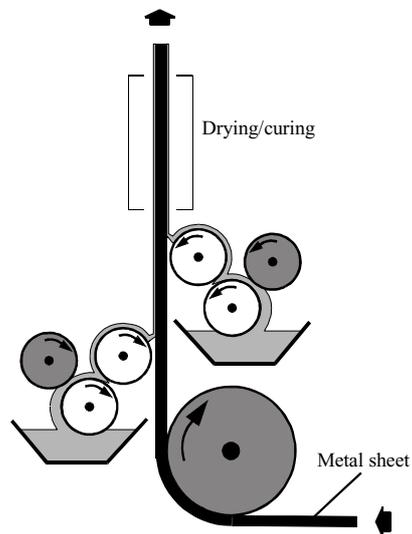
Schematic showing the reverse direction roll coating deposition technique.
